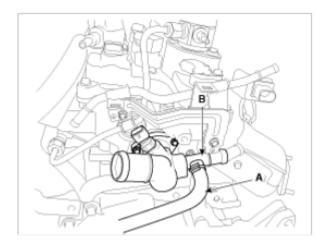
Identifying Water Temperature Control Assembly And Throttle Body Cooling Hose Courtesy of HYUNDAI MOTOR AMERICA
